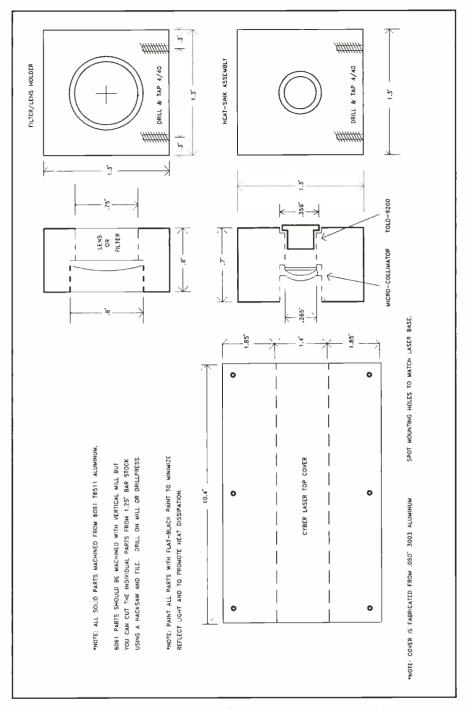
Machining details for fabricating Cyber Laser's mechanical elements.
